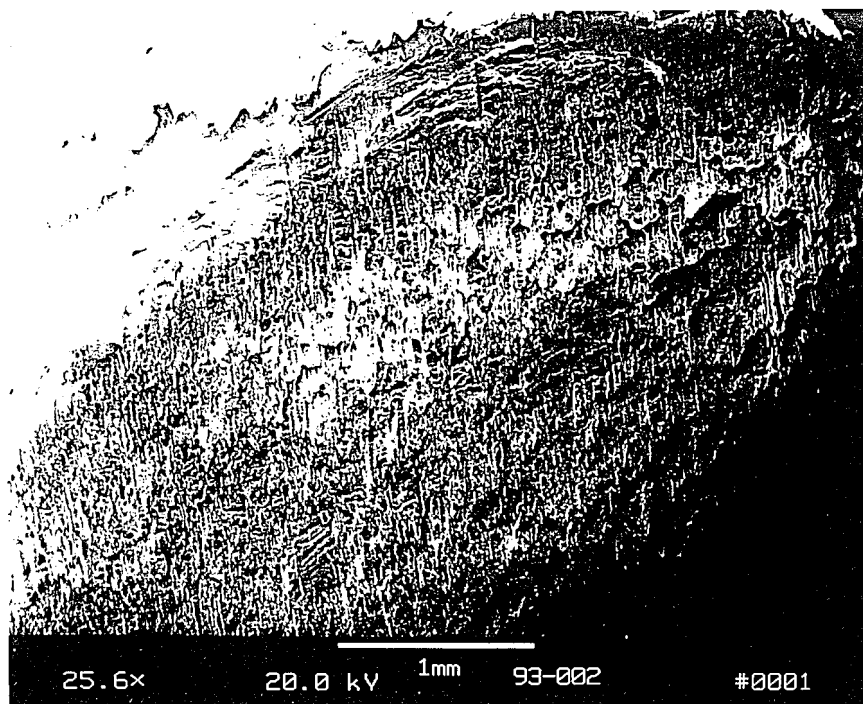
A - Heat #5 On-Cooling Gleeble Specimen (2050→1700F) Fracture Face Showing 53% R.A. Note Most of Surface Exhibits Elongated Dimples.
